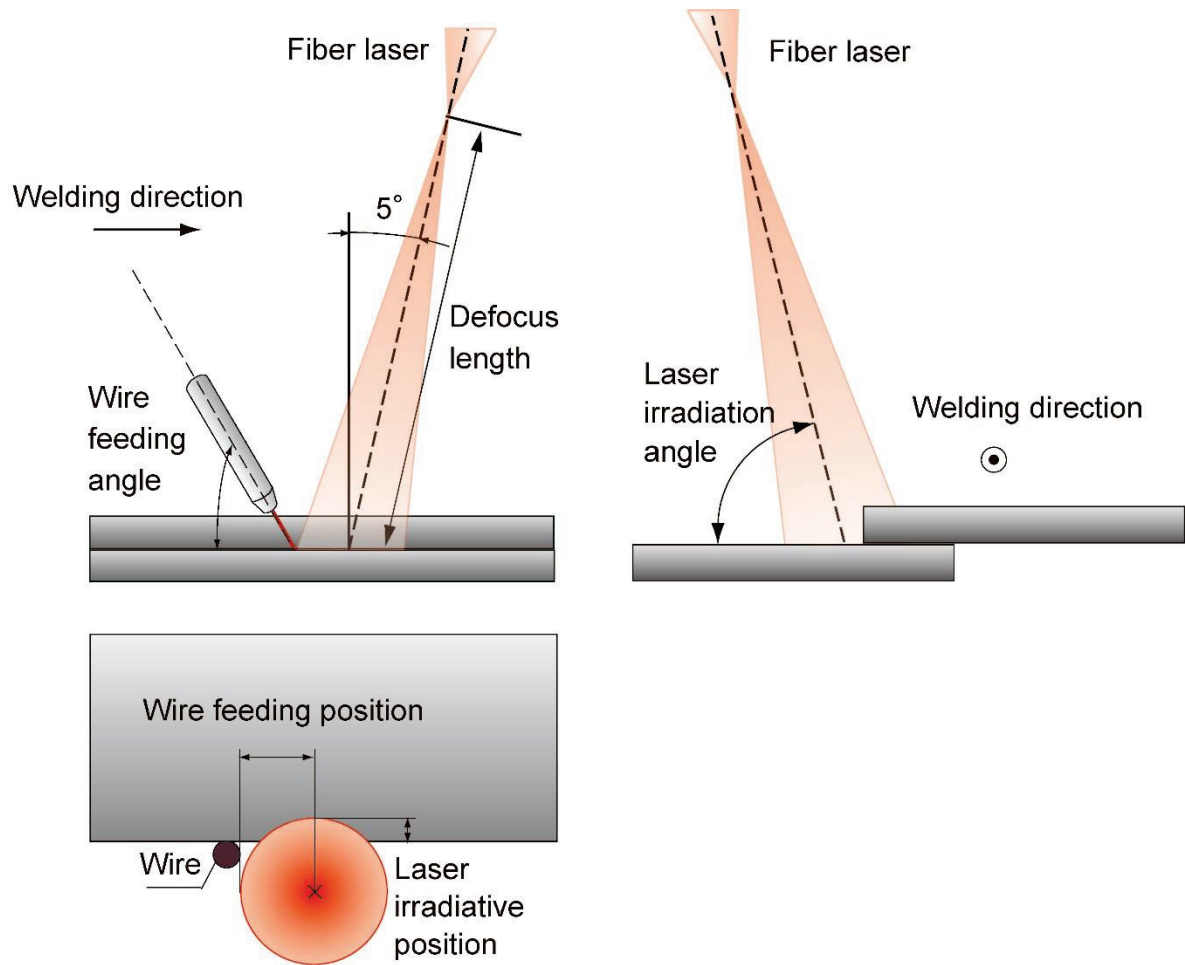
Schematic illustration of experimental set-up of Hot-wire Laser welding (t=1 mm, Fiber laser).
